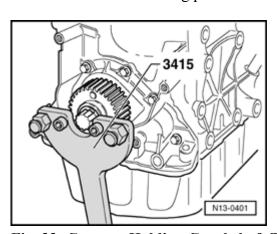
Counter-Holding Crankshaft Toothed Belt Sprocket With 3415
